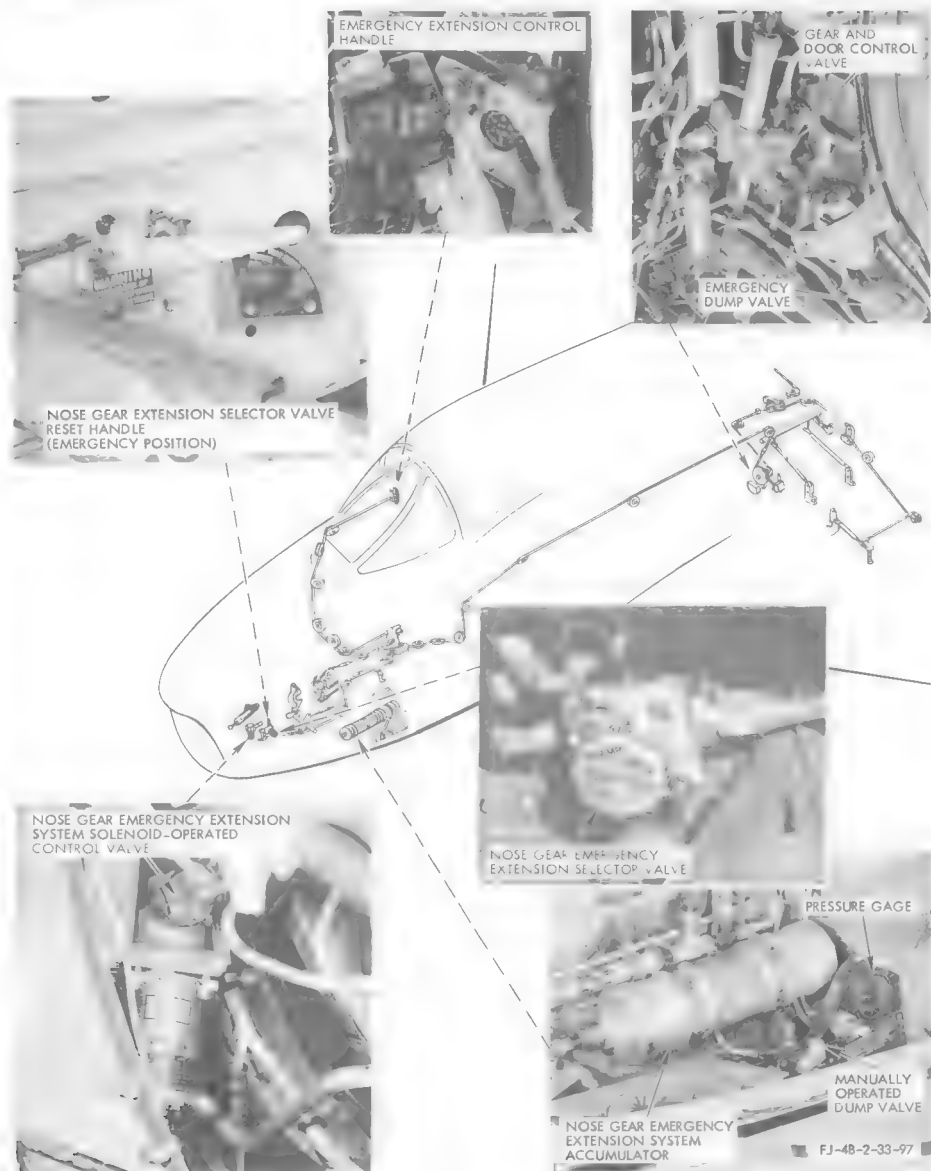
Landing Gear Emergency Extension System Unit Location
